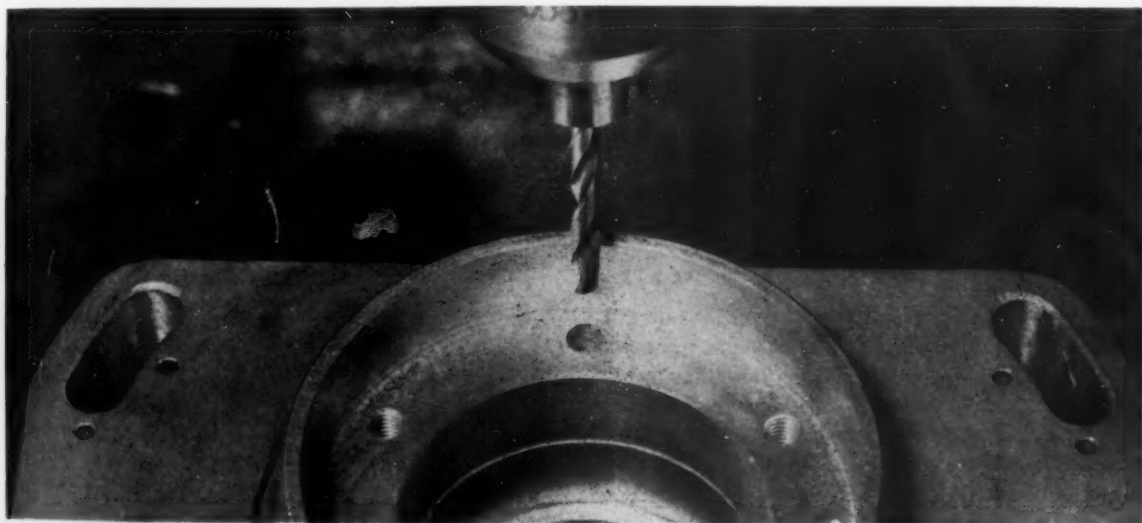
Stripped thread is drilled out before tapping with standard Heli-Coil tap.
